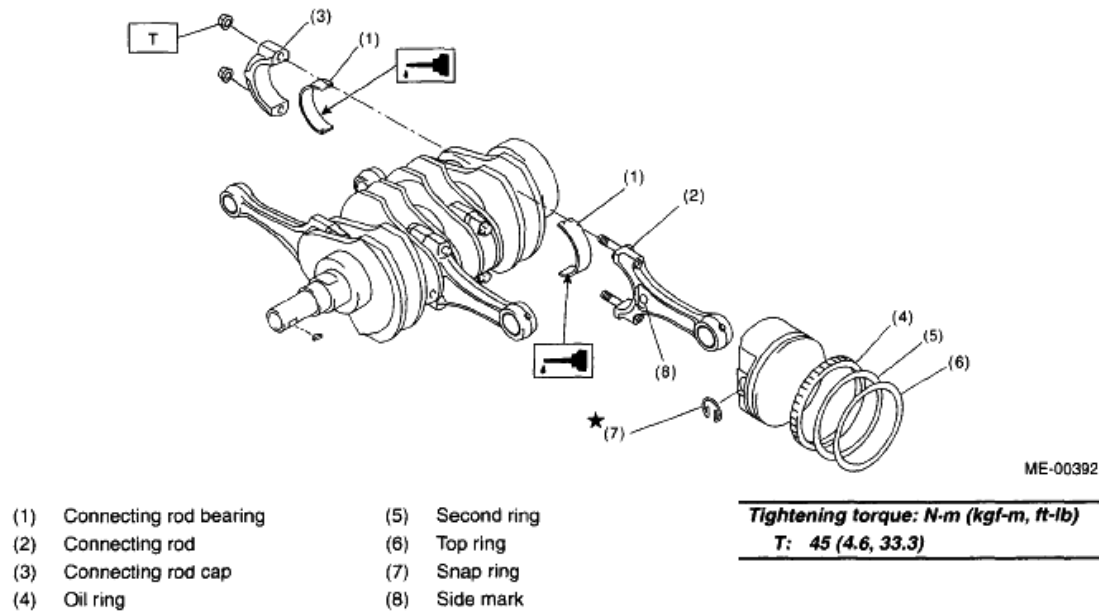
Identifying Connecting Rod Cap, Top Ring, Oil Ring, Snap Ring And Connecting Rod Bearing
